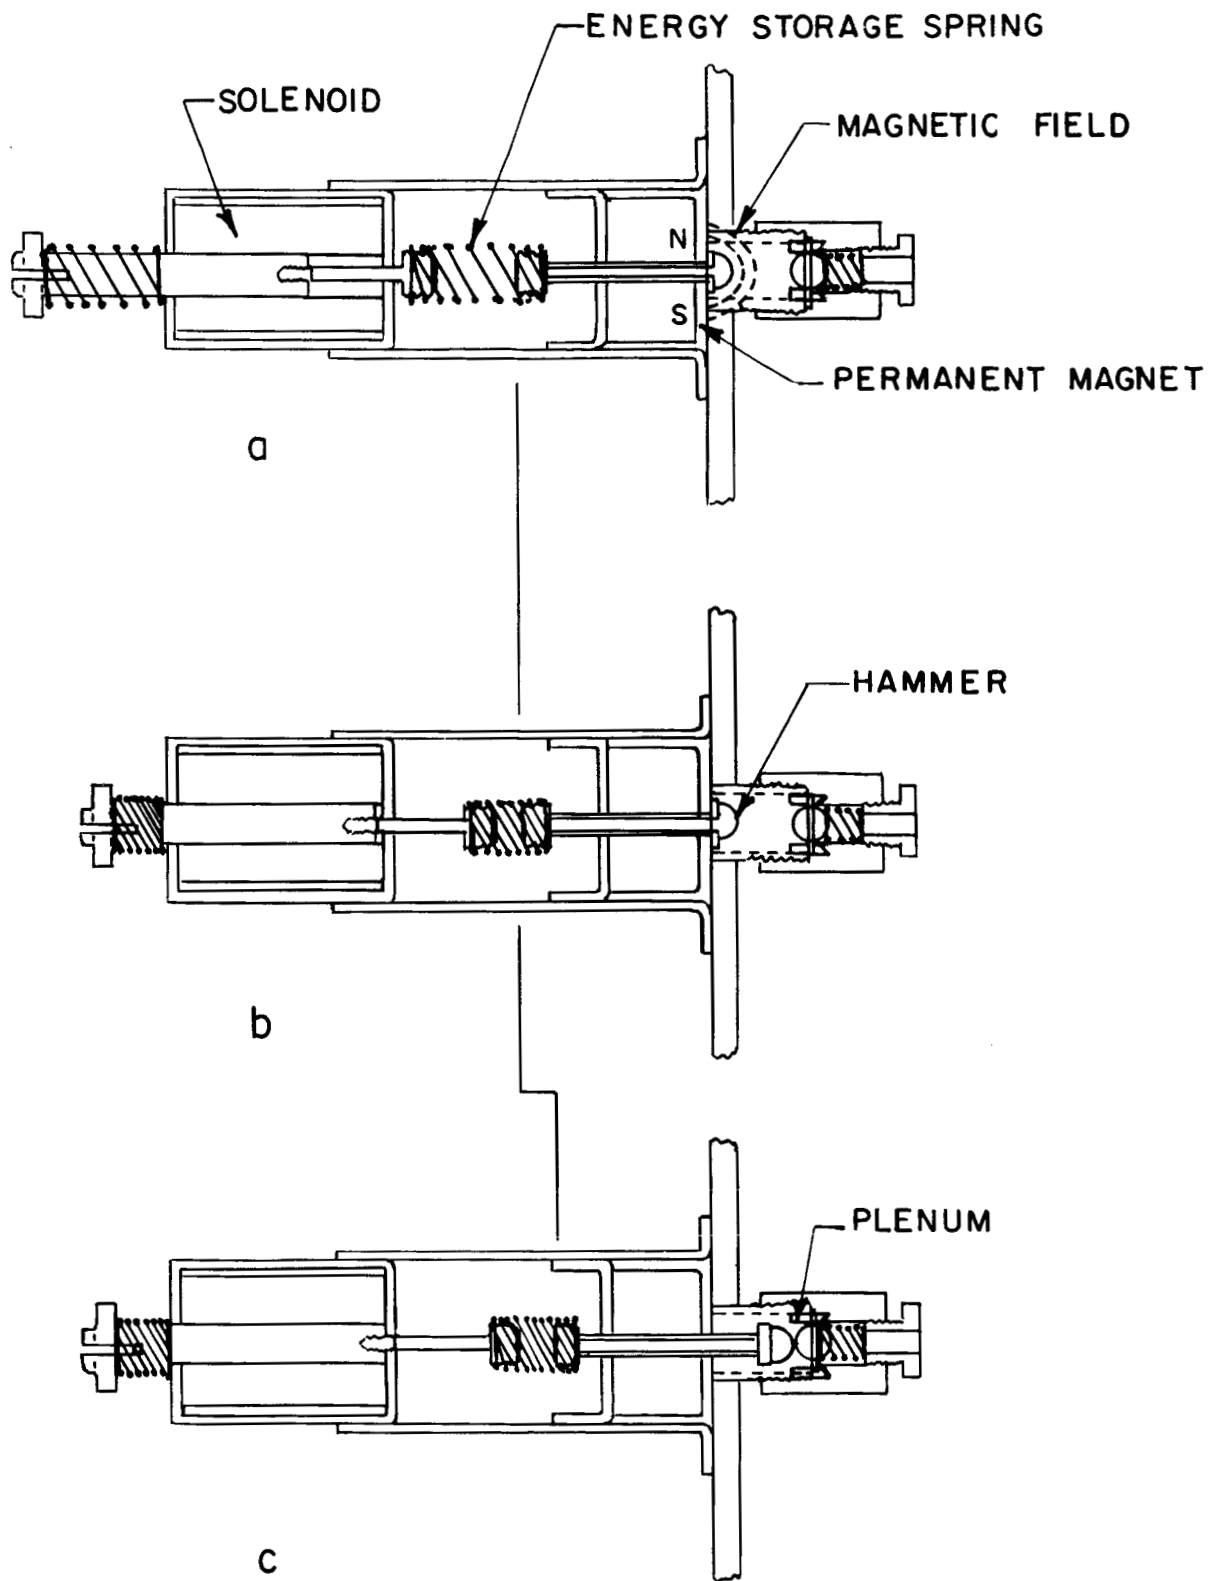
SOLENOID - COCKED, SPRING-ACTUATED VALVE
